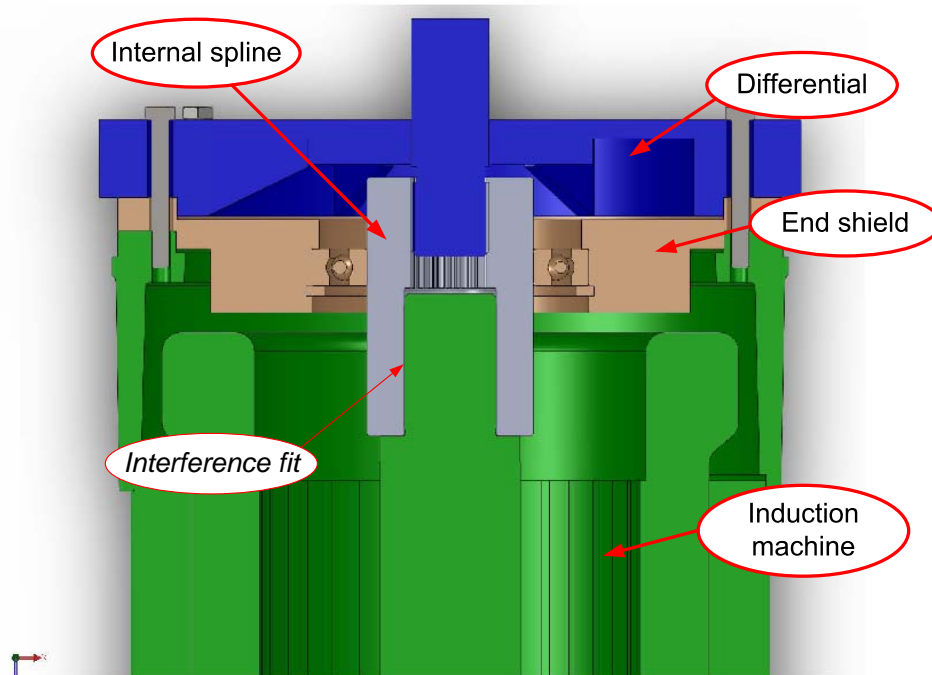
Cut through view of internal spline mounted on rotor shaft.
